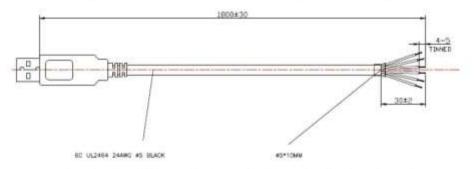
USB-RS232-WE-1800-BT Mechanical Details (dimensions in mm)
